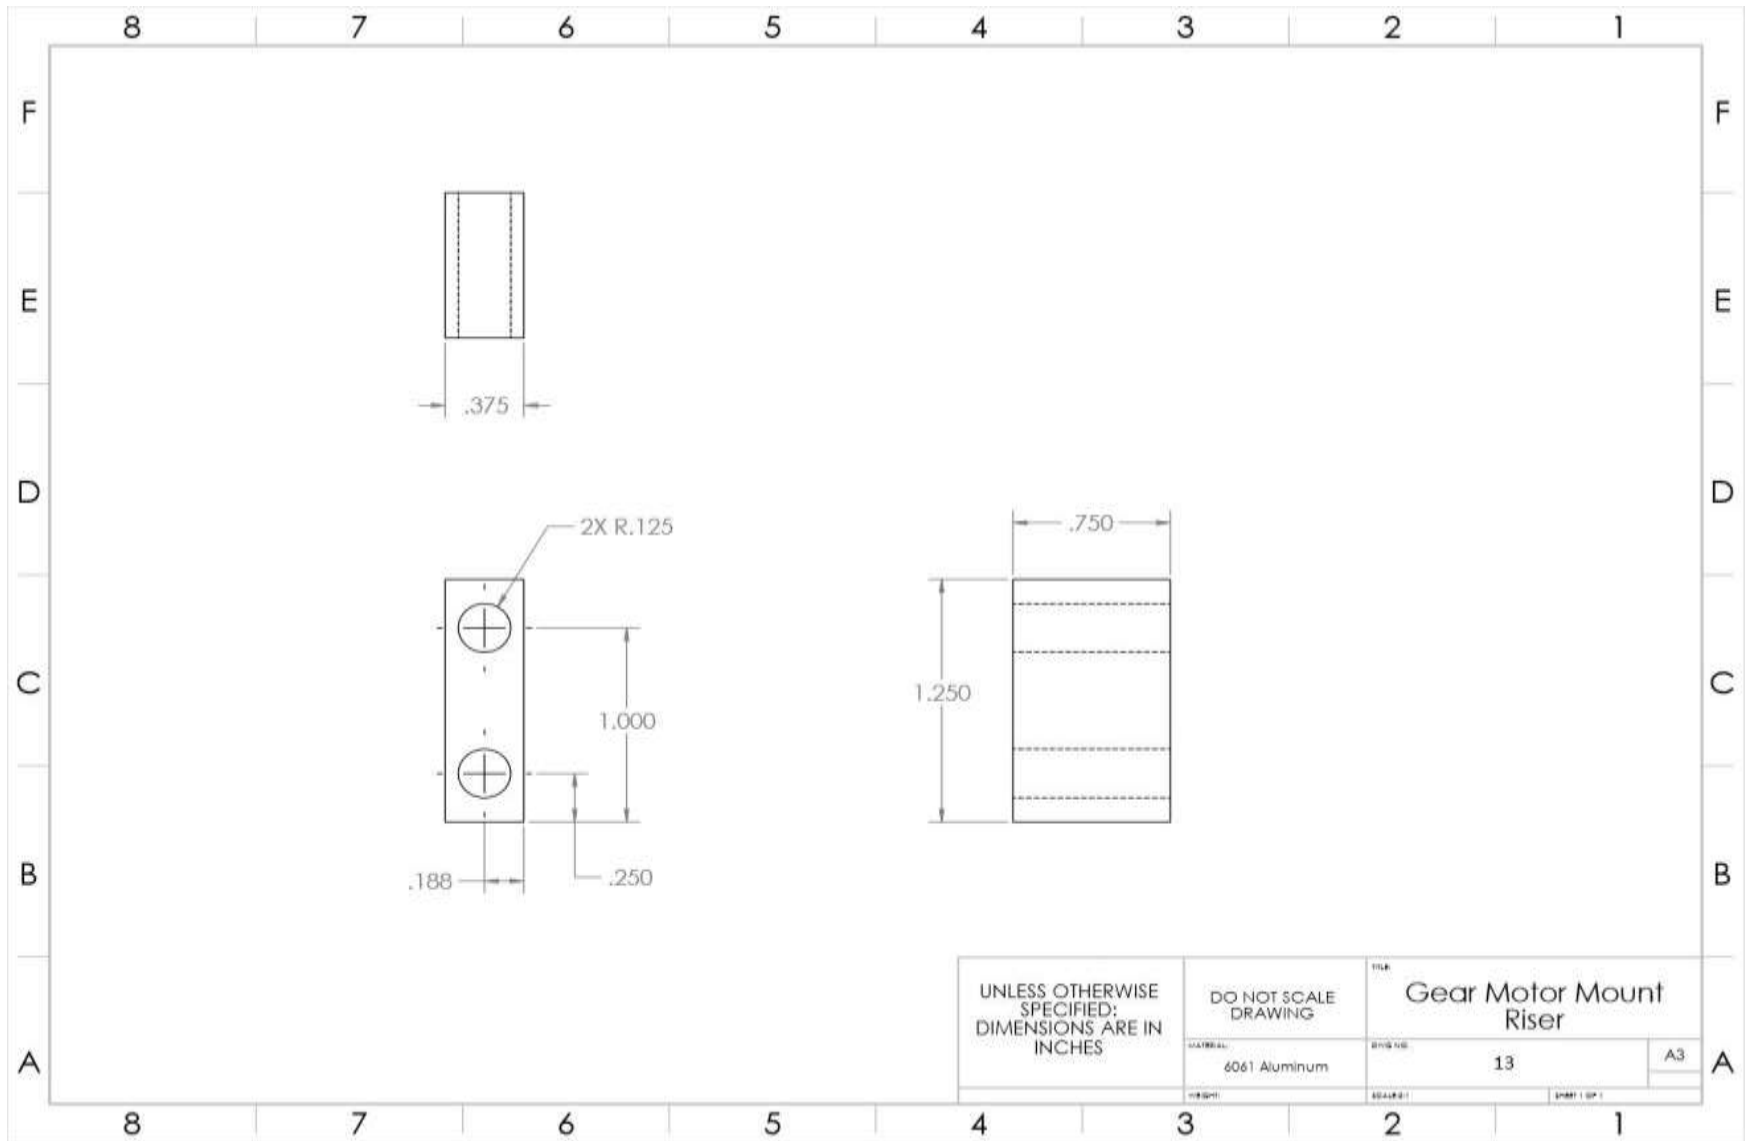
13. Mechanical Drawing of Gear Motor Mount Riser.
